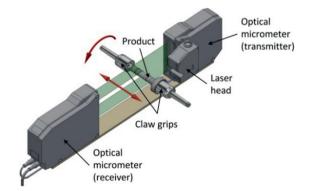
Optomechatronic module concept for inspecting the side surface of details
